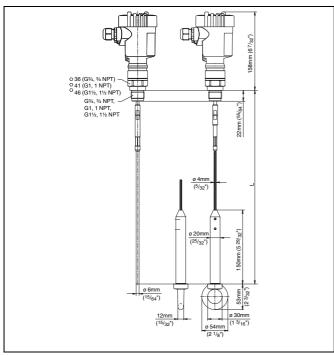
VEGAFLEX 61 - cable and rod version with thread
